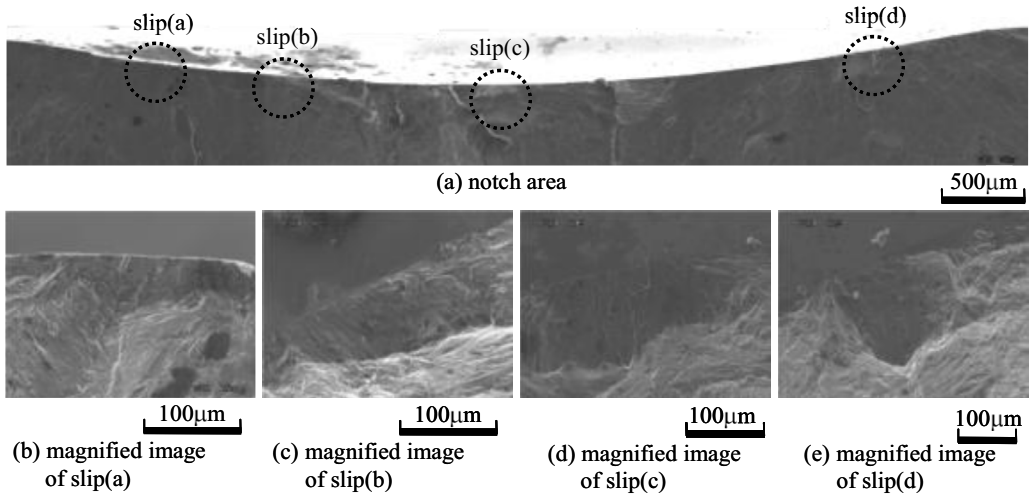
Fracture surface of plane bending test (slip origin type) [430MPa,  $N_f=6.6 \times 10^5$  cycles]
